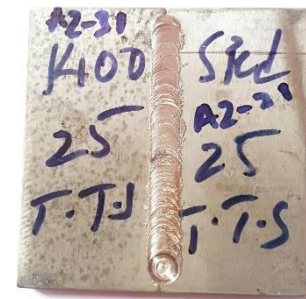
The weld was made at 1400rpm at 25 tool traverse speed with similar welding Az31 alloy
